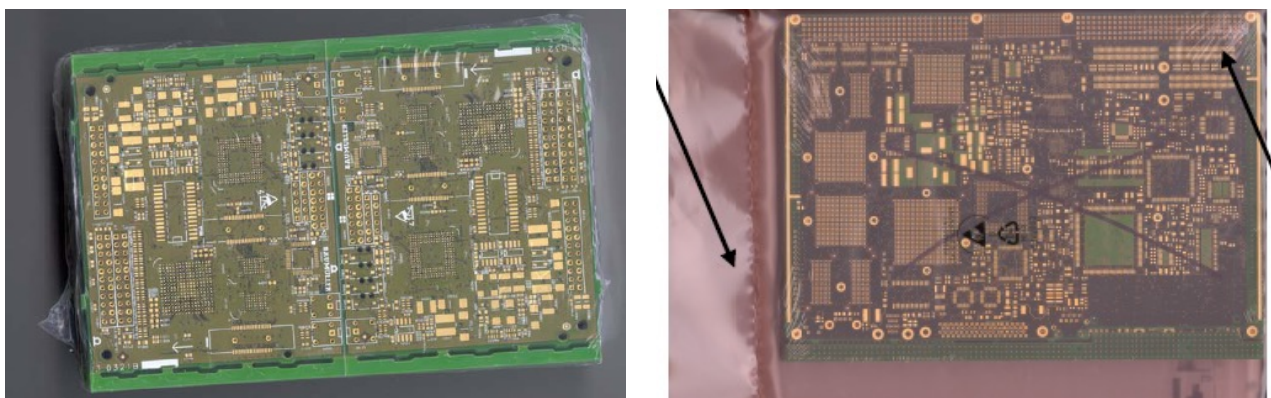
Packaged PCBs, left: in PE shrink film, right: in an additional 100µm thick PE bag.
